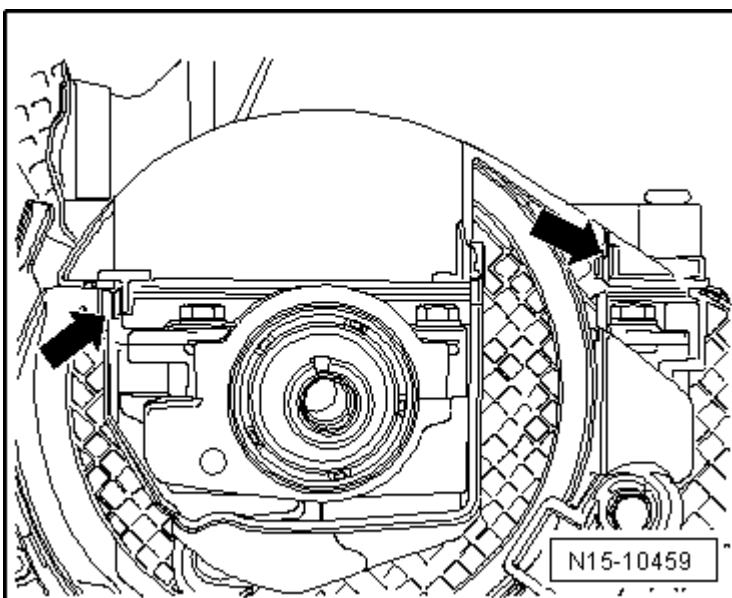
Pressing In Gasket Up To Stop Using Thrust Sleeve 3241/1 And Bolt 3241/3
